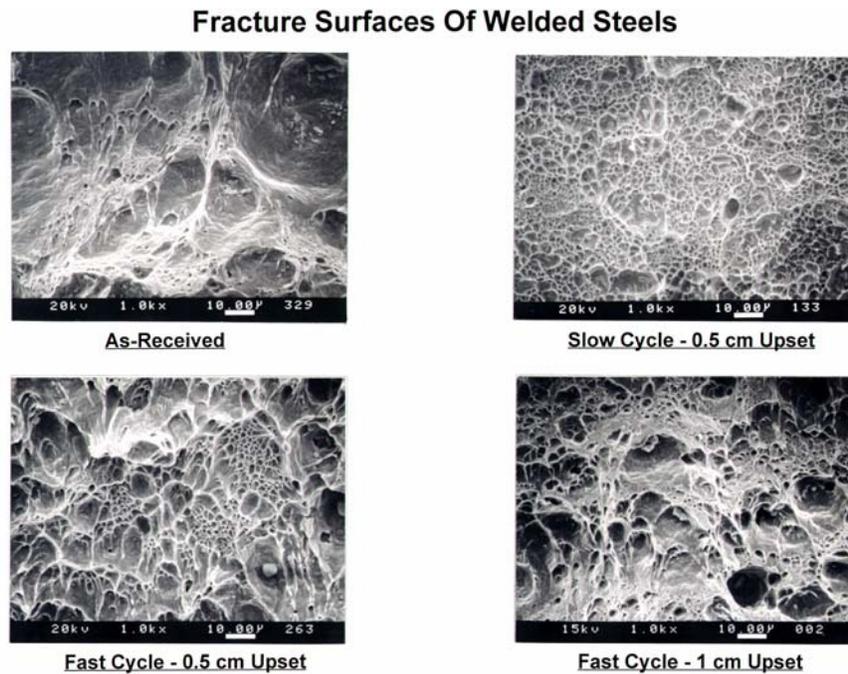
Fracture Appearance of Solid State Weldments
